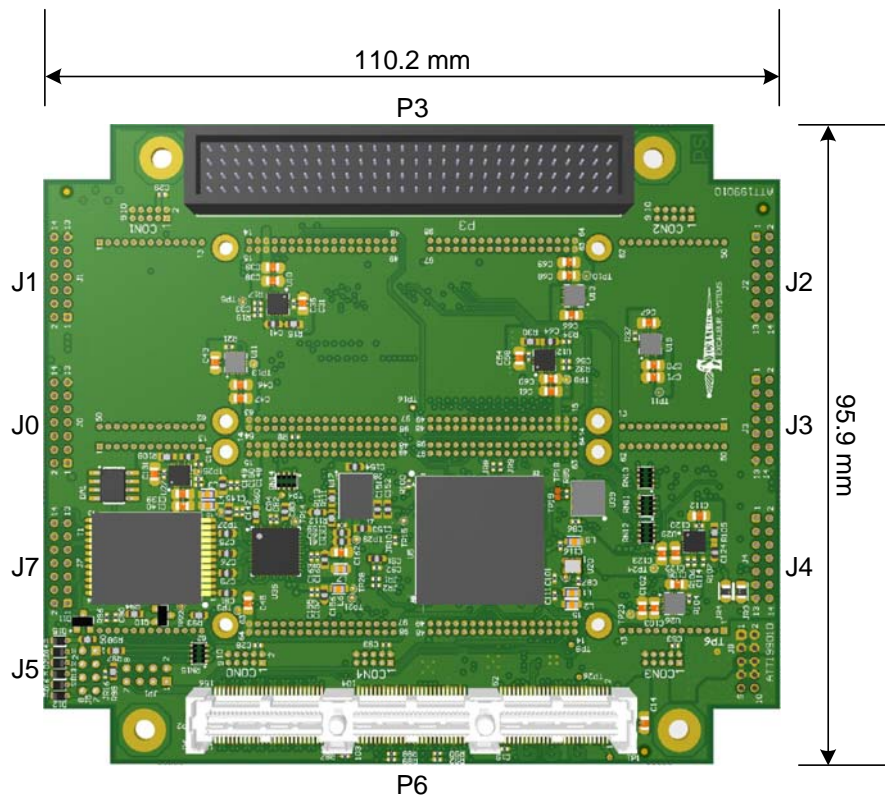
EXC-8000PCIe104 Board Layout – Bottom View
